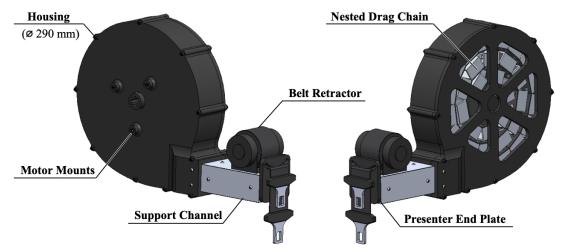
CAD schematic of final presenter design solution, with callouts for major components.
